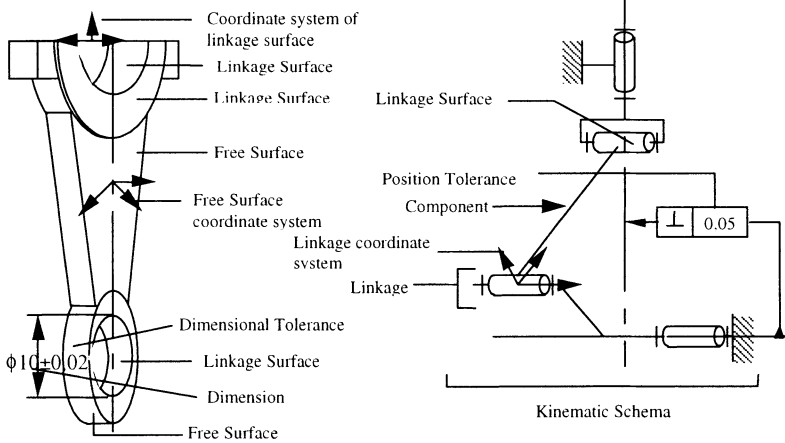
Example of geometric models and entities taking part to the tolerancing “view” (At left : partial tolerancing of a component, at right : partial tolerancing of a mechanism)
